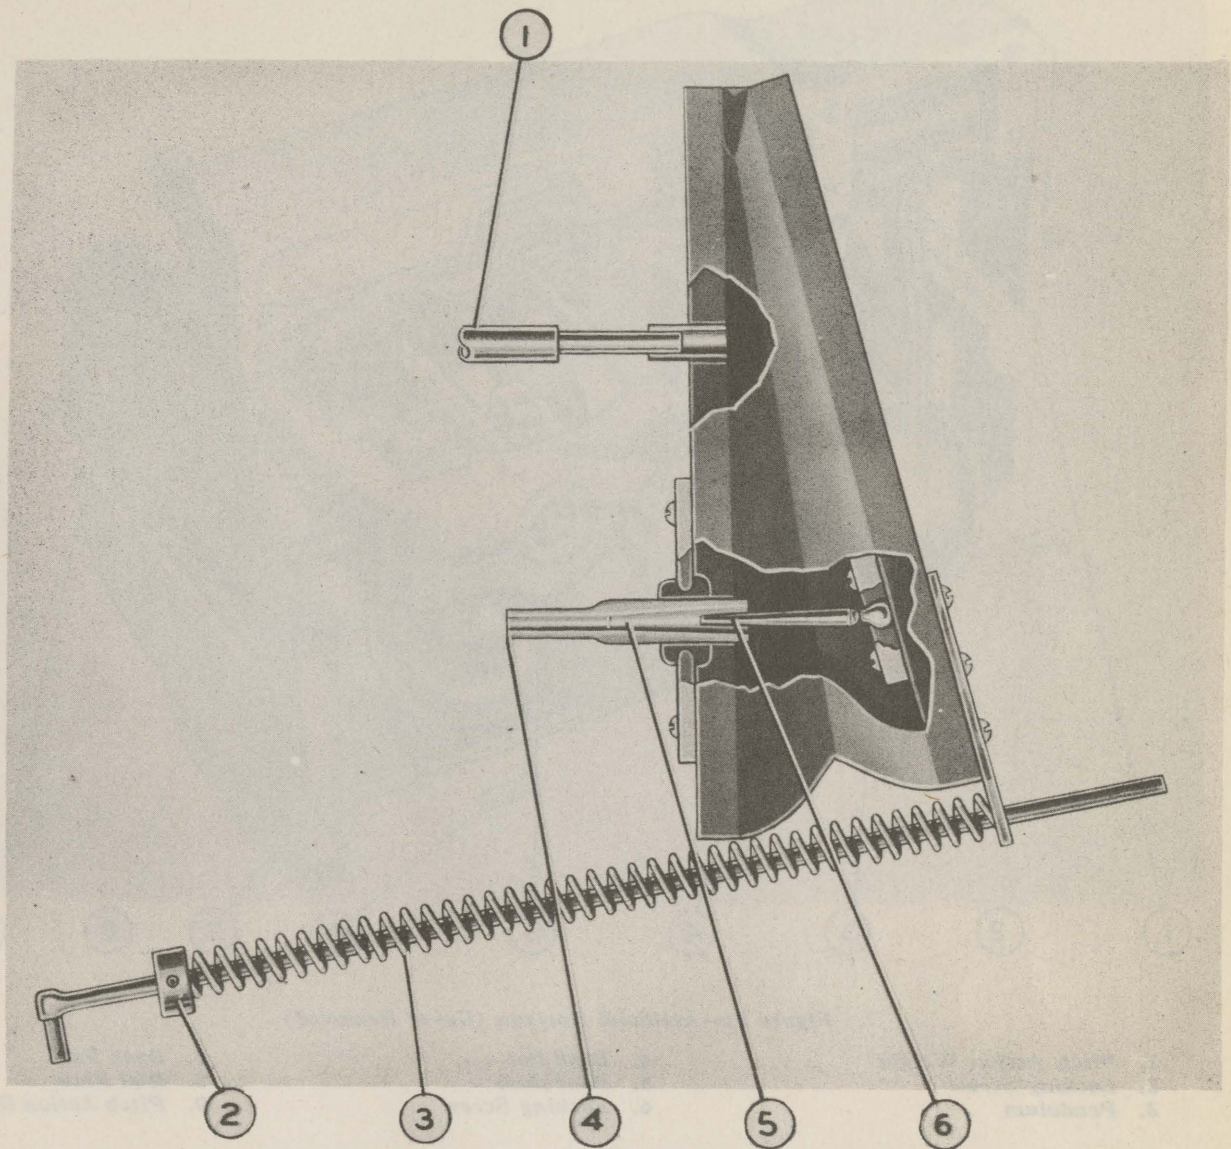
Tachometer and Manifold Pressure Regulating Bellows
